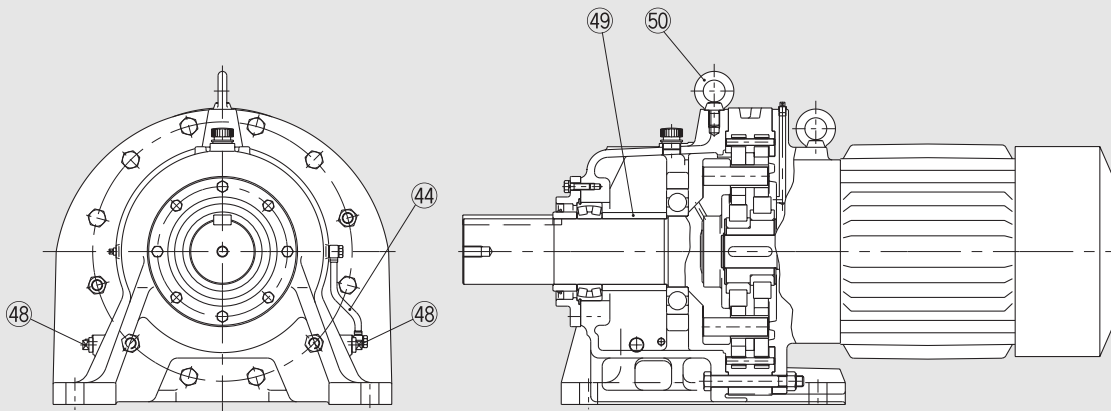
Type CHHM (Horizontal-Gearmotor)
